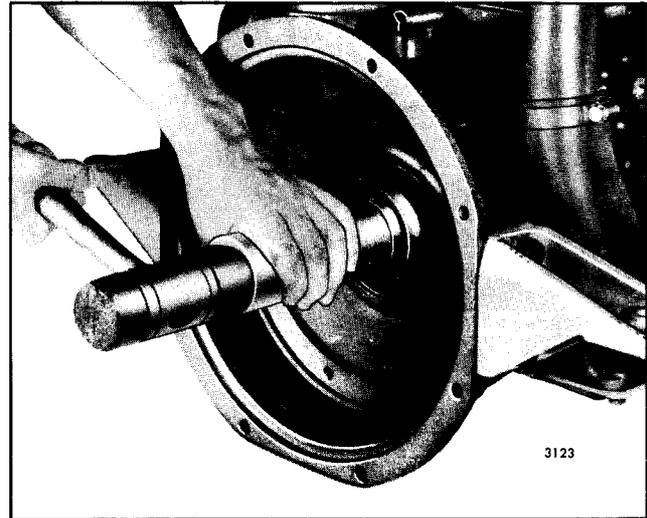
Installing Clutch Drive Shaft Pilot Bearing in Clutch Drive Adaptor
